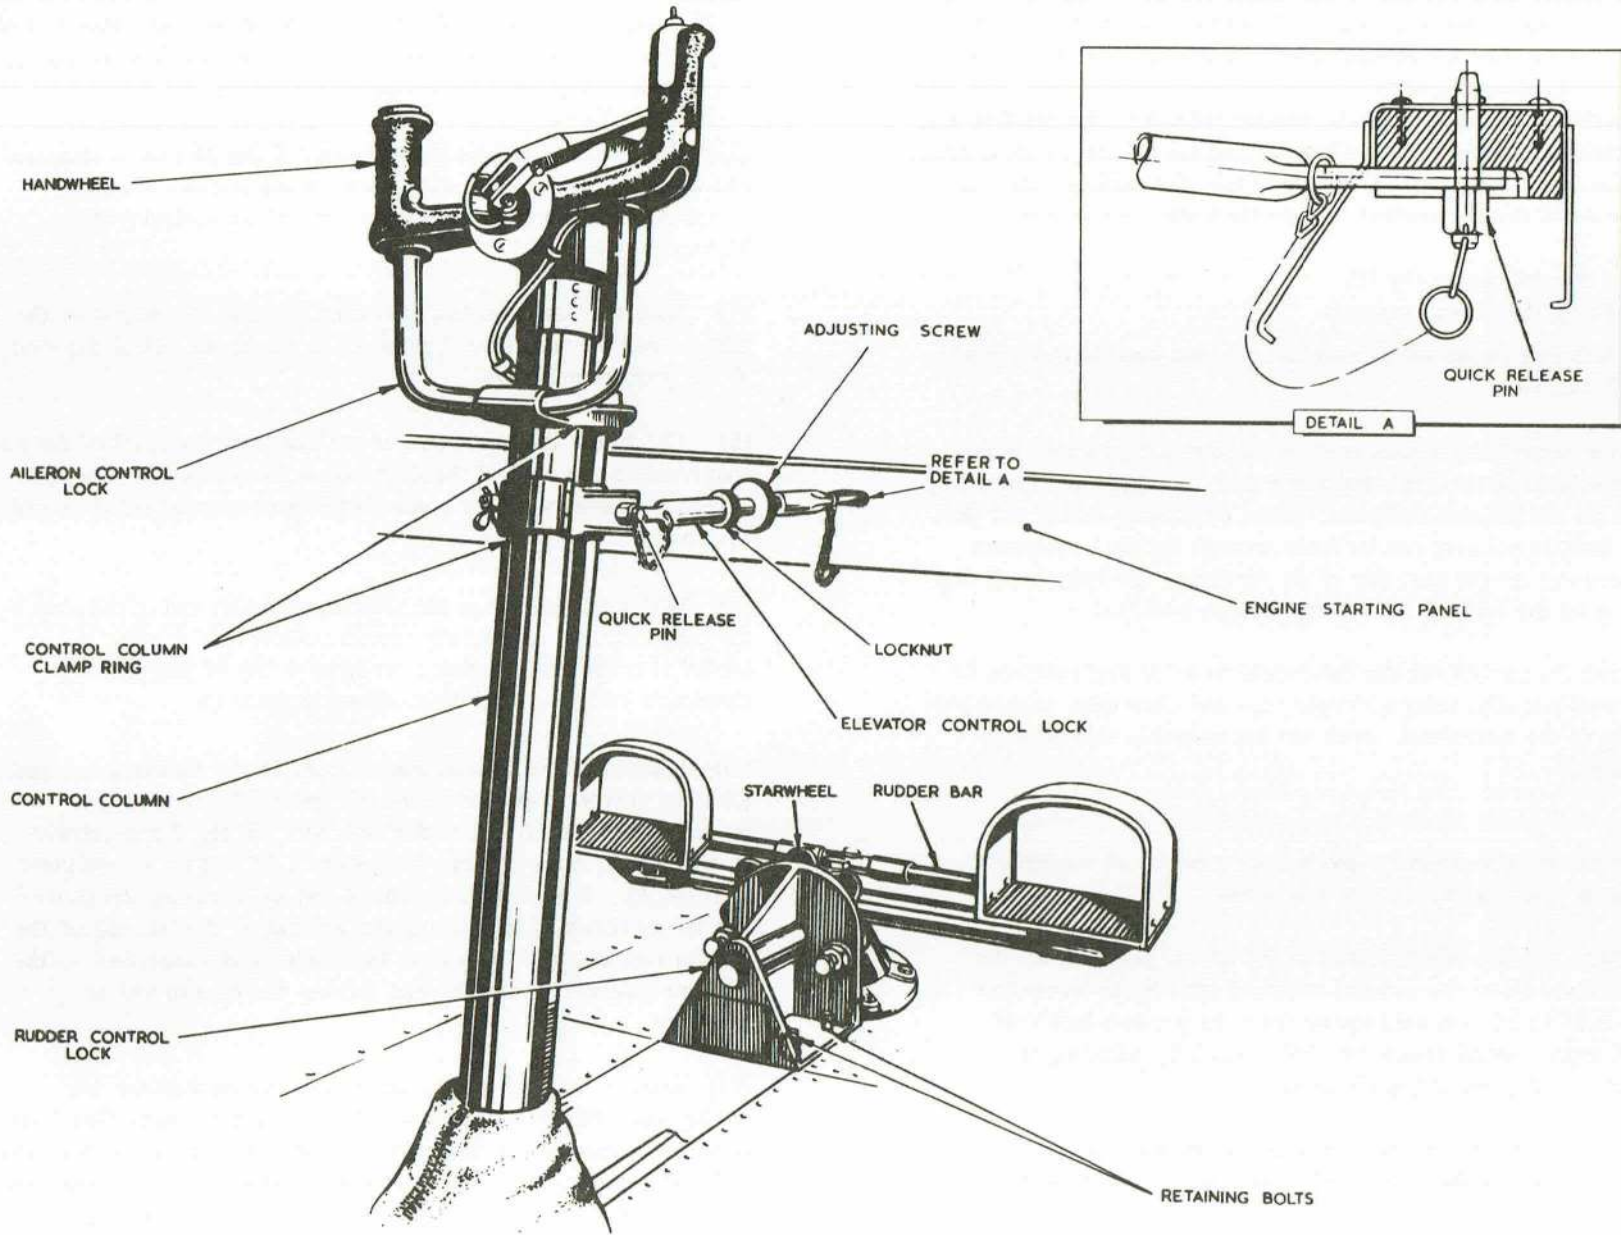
CONTROLS NEUTRAL RIGGING LOCKS
